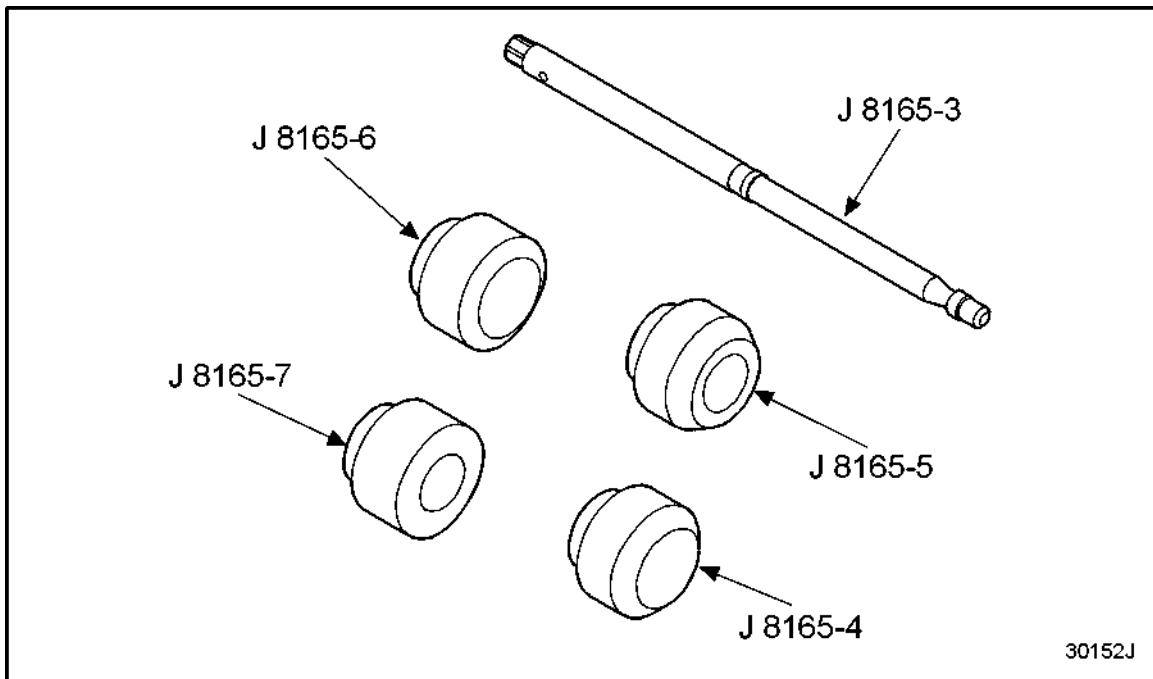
Valve Seat Grind Adapt Kit 2 Valv-71, J 8165-8
